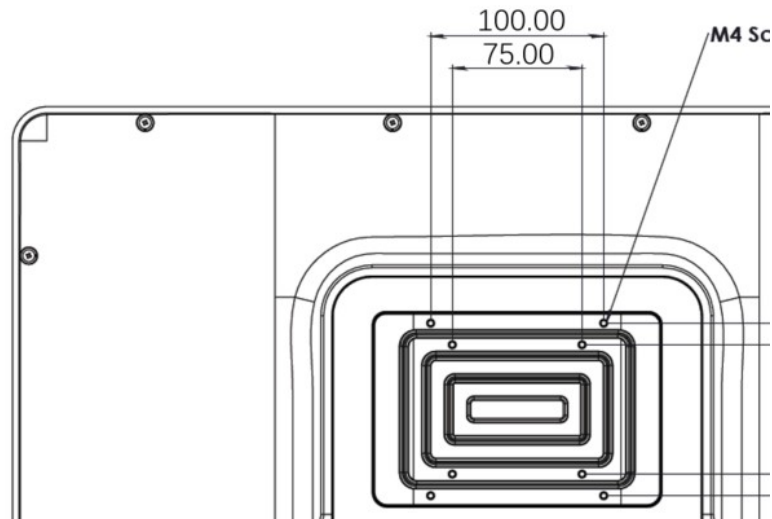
VESA Mounting of the POC-421-14 Standard Model
